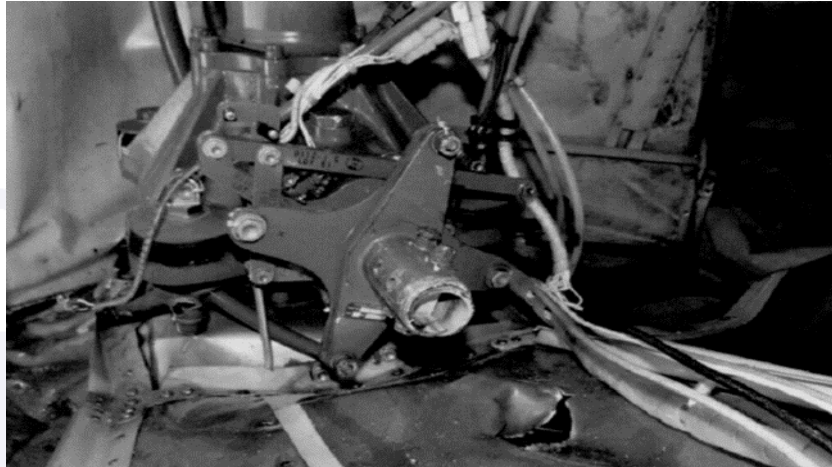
Overview of the Yoke, still assembled in the gearbox.
